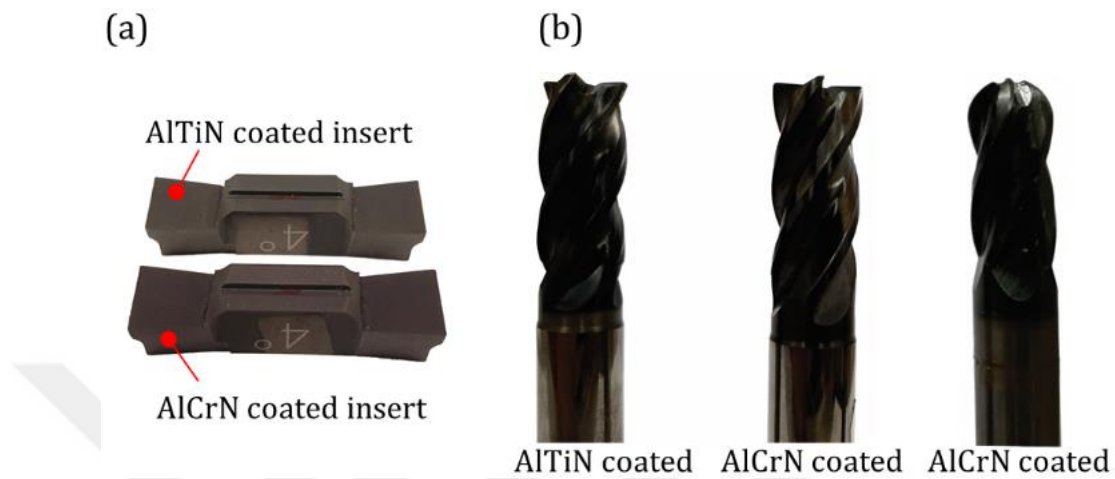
Cutting tools used in the experiments; (a) coated turning inserts, (b) coated end mills and ball-end mill.
